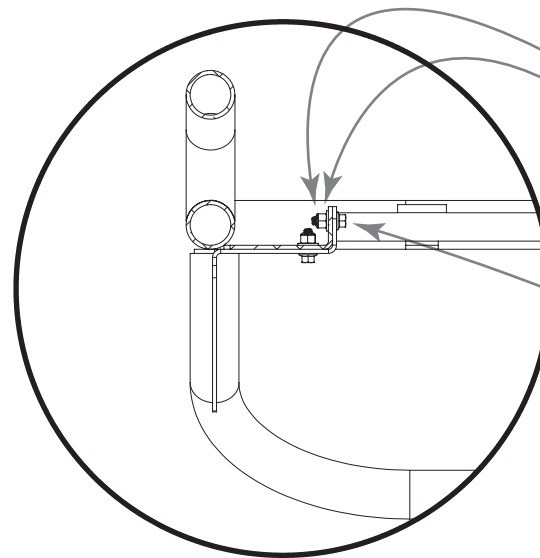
Detail E & F display how it fastens to the Open Front Weldment.
